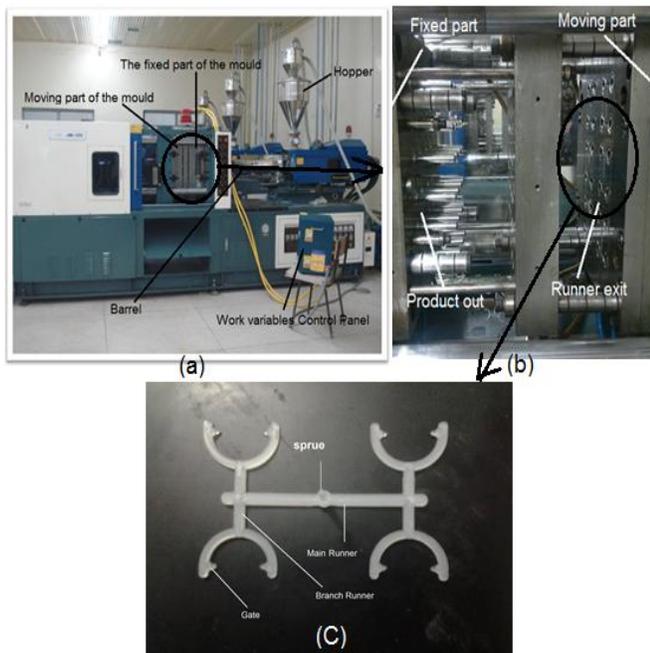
(a) injection machine JMI/SPI-150 used to produce cylinder part (b) mold of cylinder part (c) Runner waste
